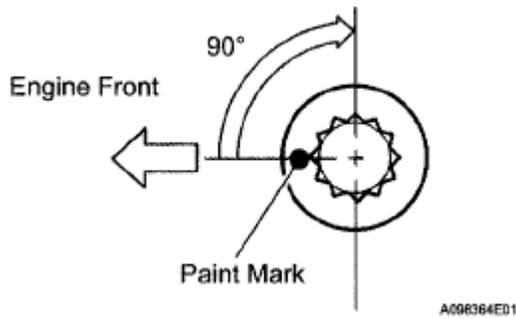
Tightening Cylinder Head Bolts An Additional 90°
